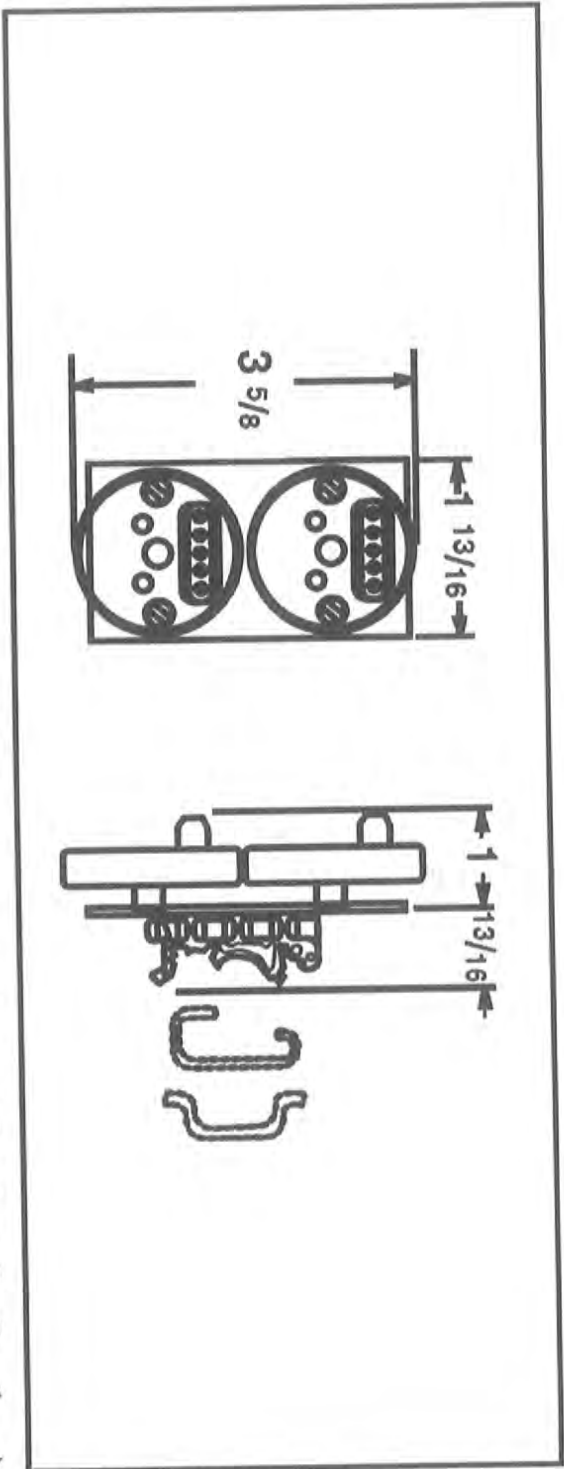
TX 90-DIN DIN Rail Mounting Adapter (in Inches)
